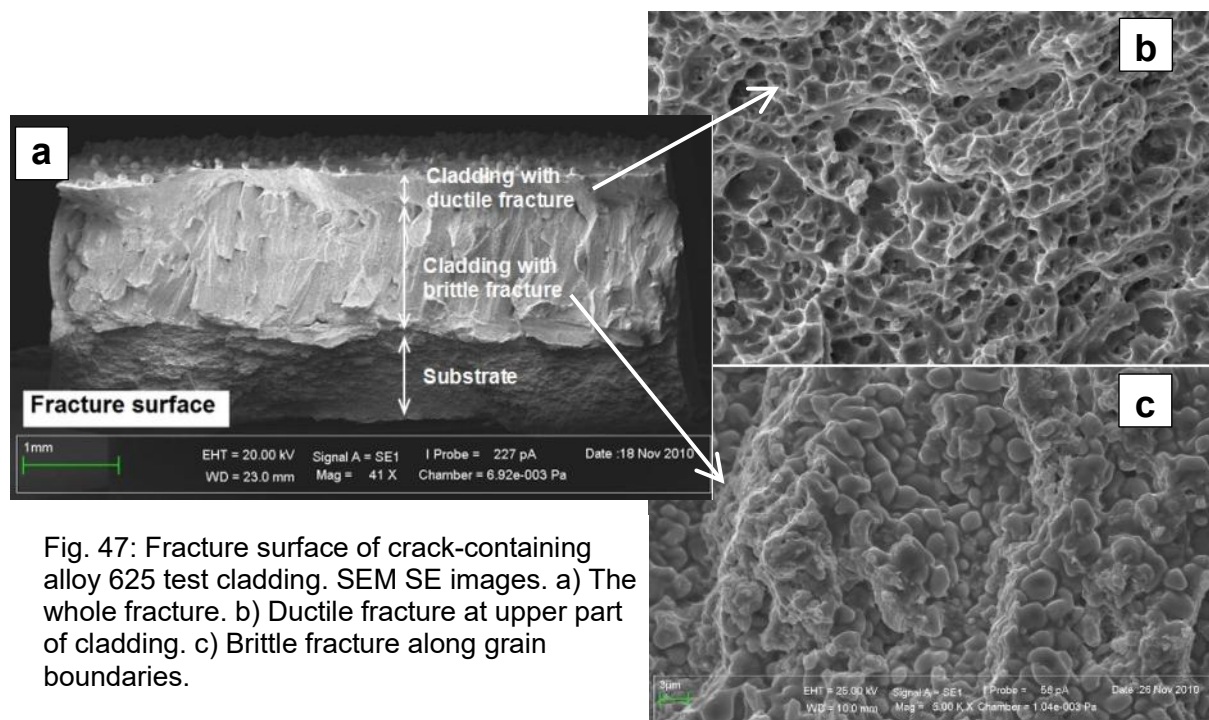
Fracture surface of crack-containing alloy 625 test cladding. SEM SE images. a) The whole fracture. b) Ductile fracture at upper part of cladding. c) Brittle fracture along grain boundaries.
